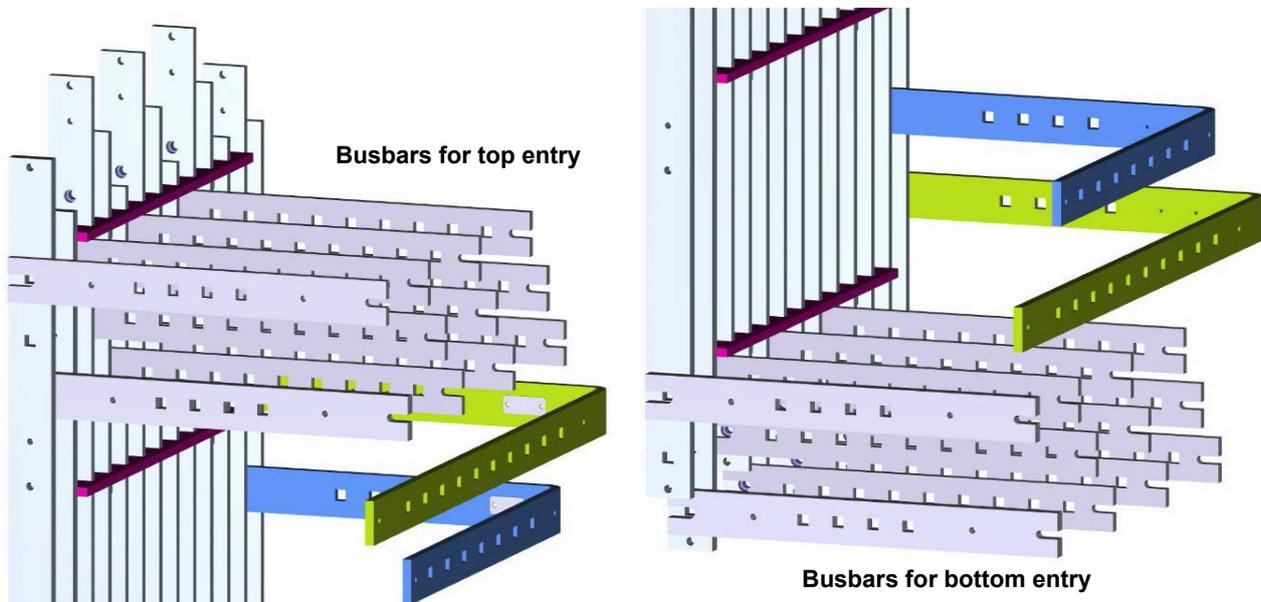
Alternative Top and Bottom entry busbar arrangement
